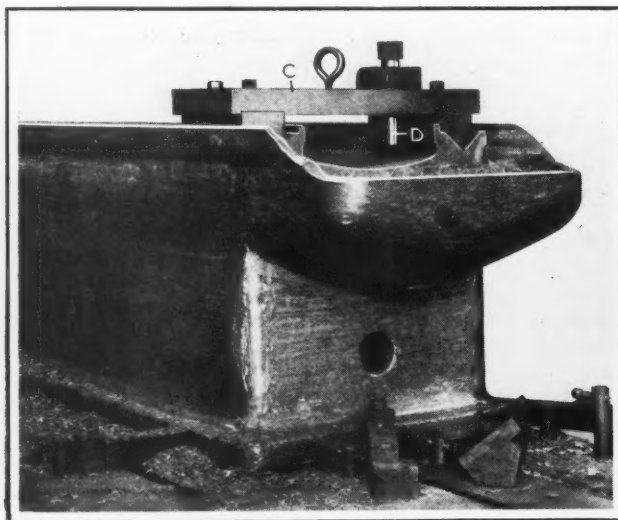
Gaging Fixture used in determining the Fit of the Inner Guide Surfaces during the Finish-planing
